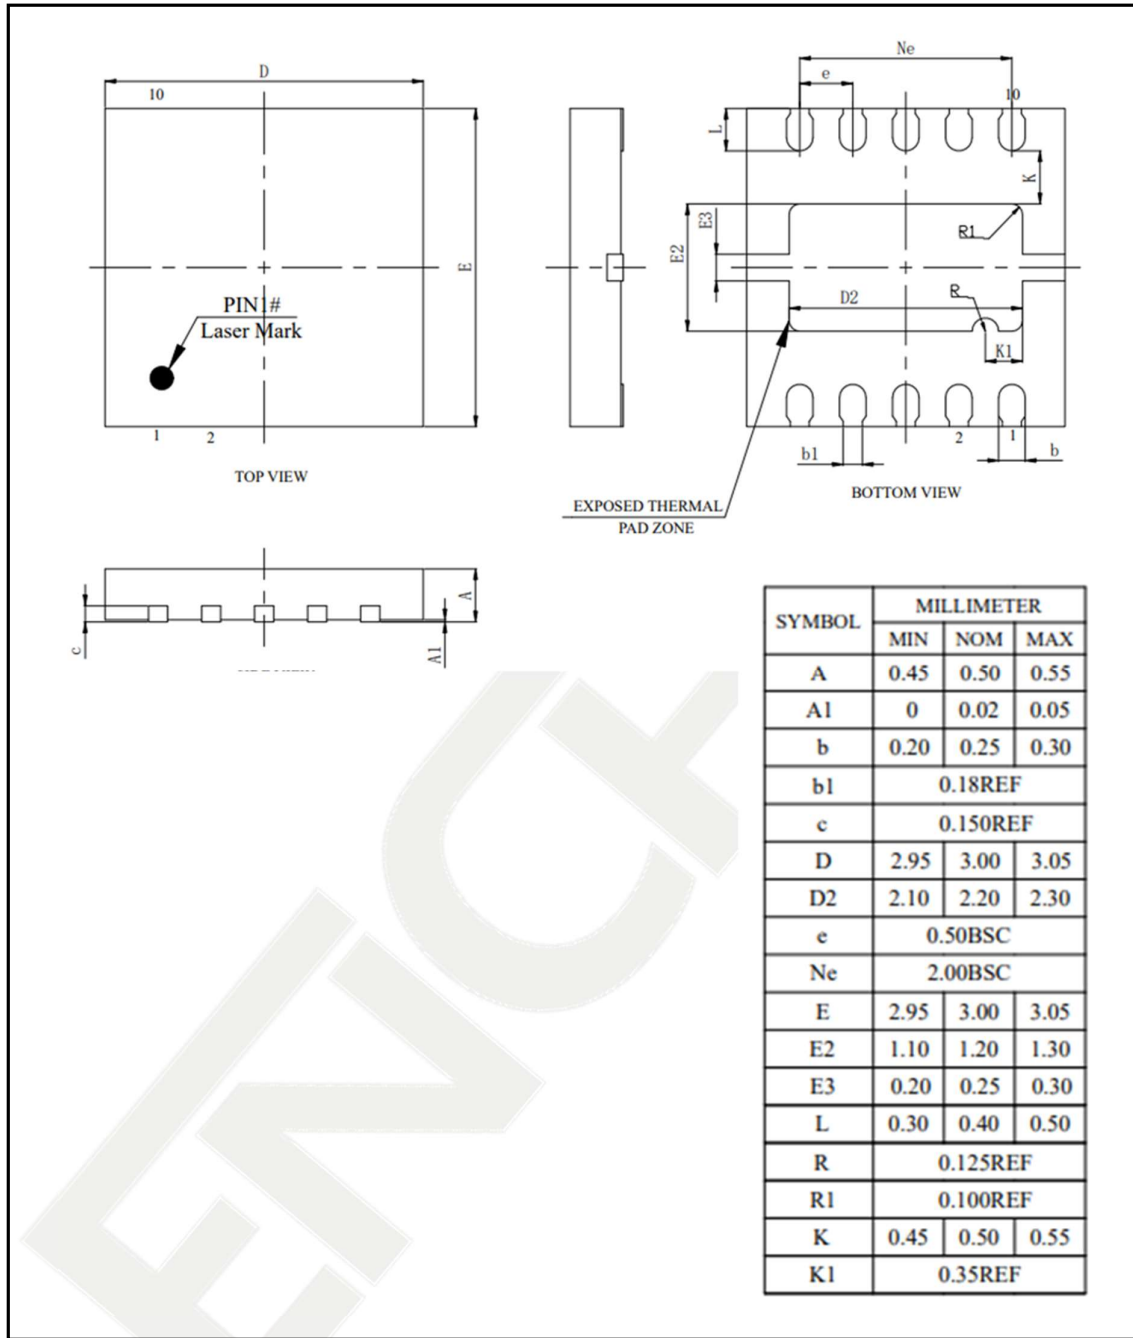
SSOP10 Mechanical Data and Package Dimensions
